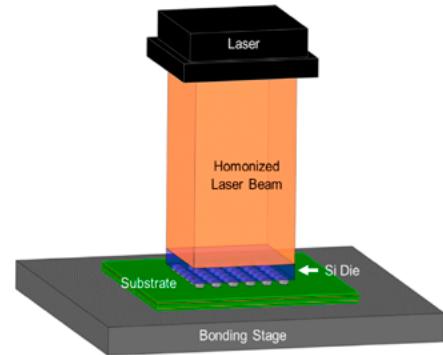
LAB chip bonding process. COURTESY: link.springer.com
